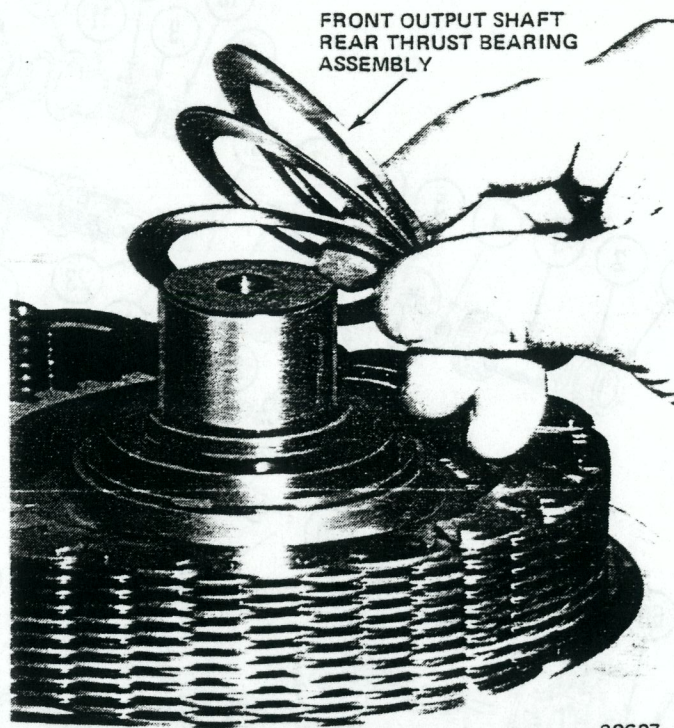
D-12 Front Output Shaft Rear Thrust Bearing Assembly Removal/Installation
